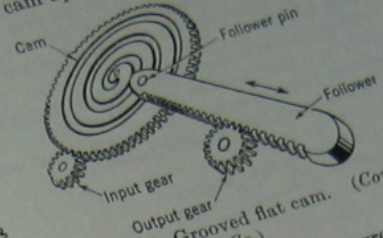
Grooved flat cam. (Courtesy of Ford Instrument Co.)
